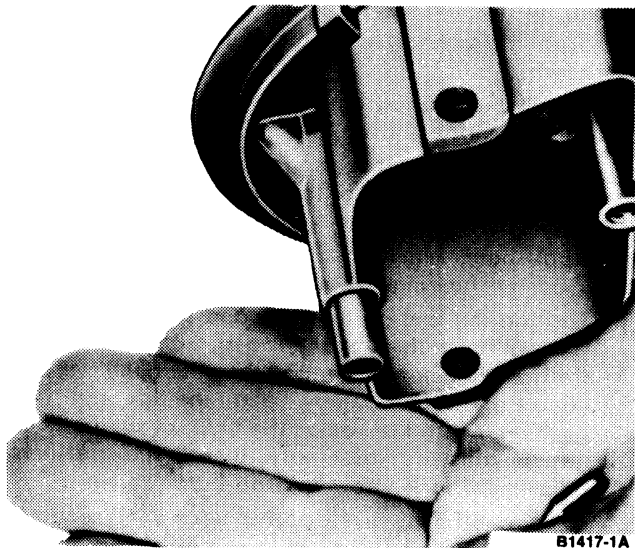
Model 4180-C 4-V Carburetor Assembly
